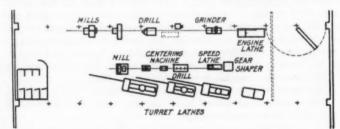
Layout of Department for Machining Apron and Turret-Slide Parts
